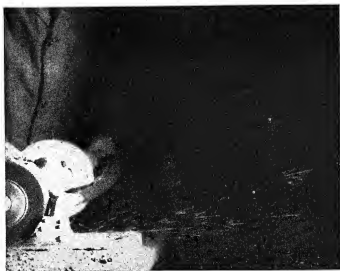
Grinding grey iron with extractor head fitted and operating. (Cp. Fig. 69.)
